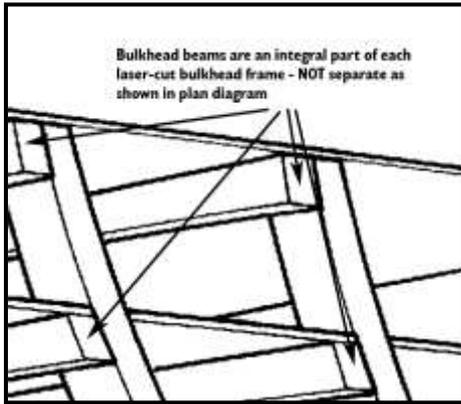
A Difference Between Plan Sheet Drawings and the Kit
